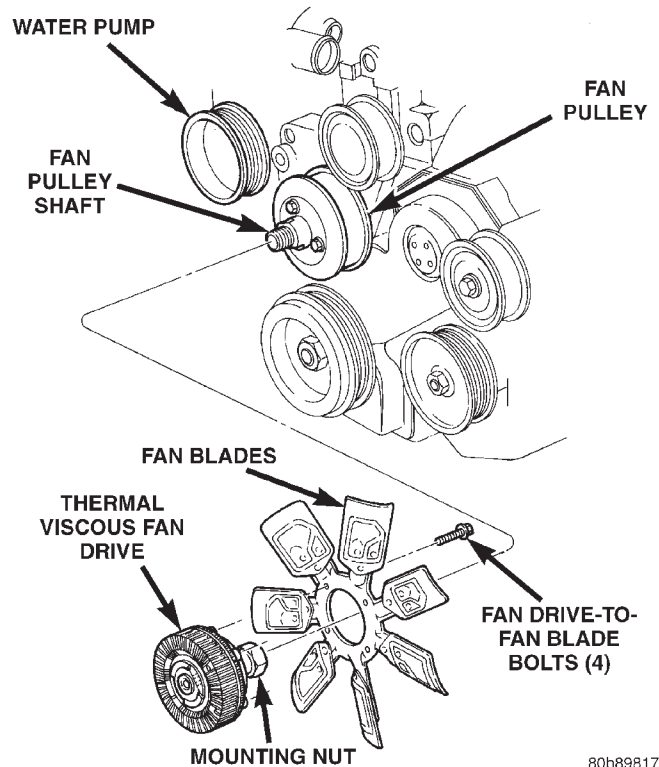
Thermal Viscous Fan Drive and Blade Assembly
